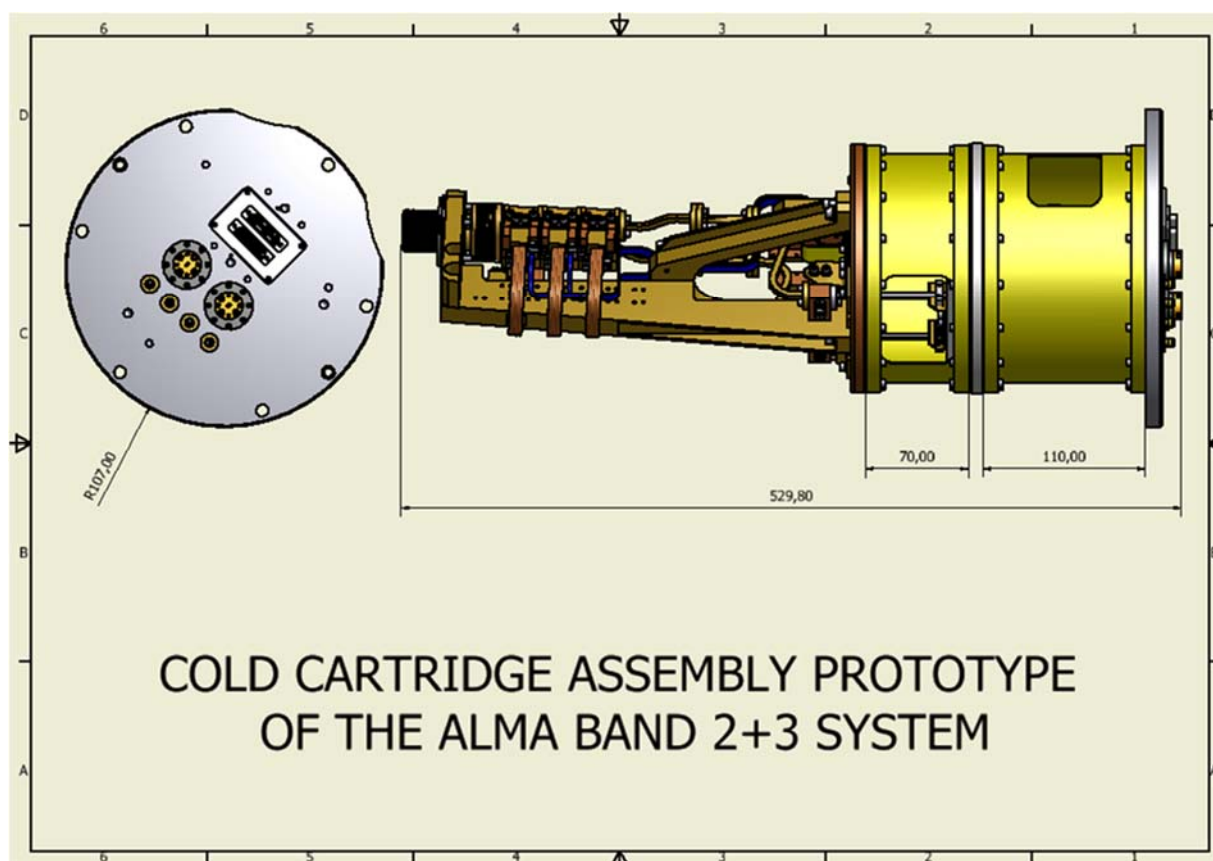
Main dimensions of the Cold Cartridge Assembly for the ALMA Band 2+3 prototype
